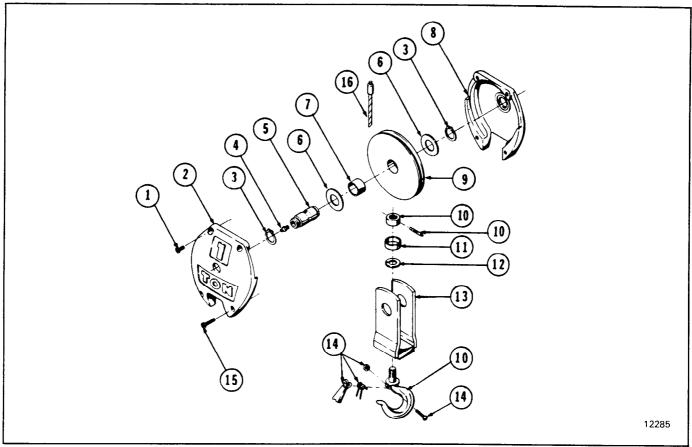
Lower Block Assembly and Wire Rope Parts.
